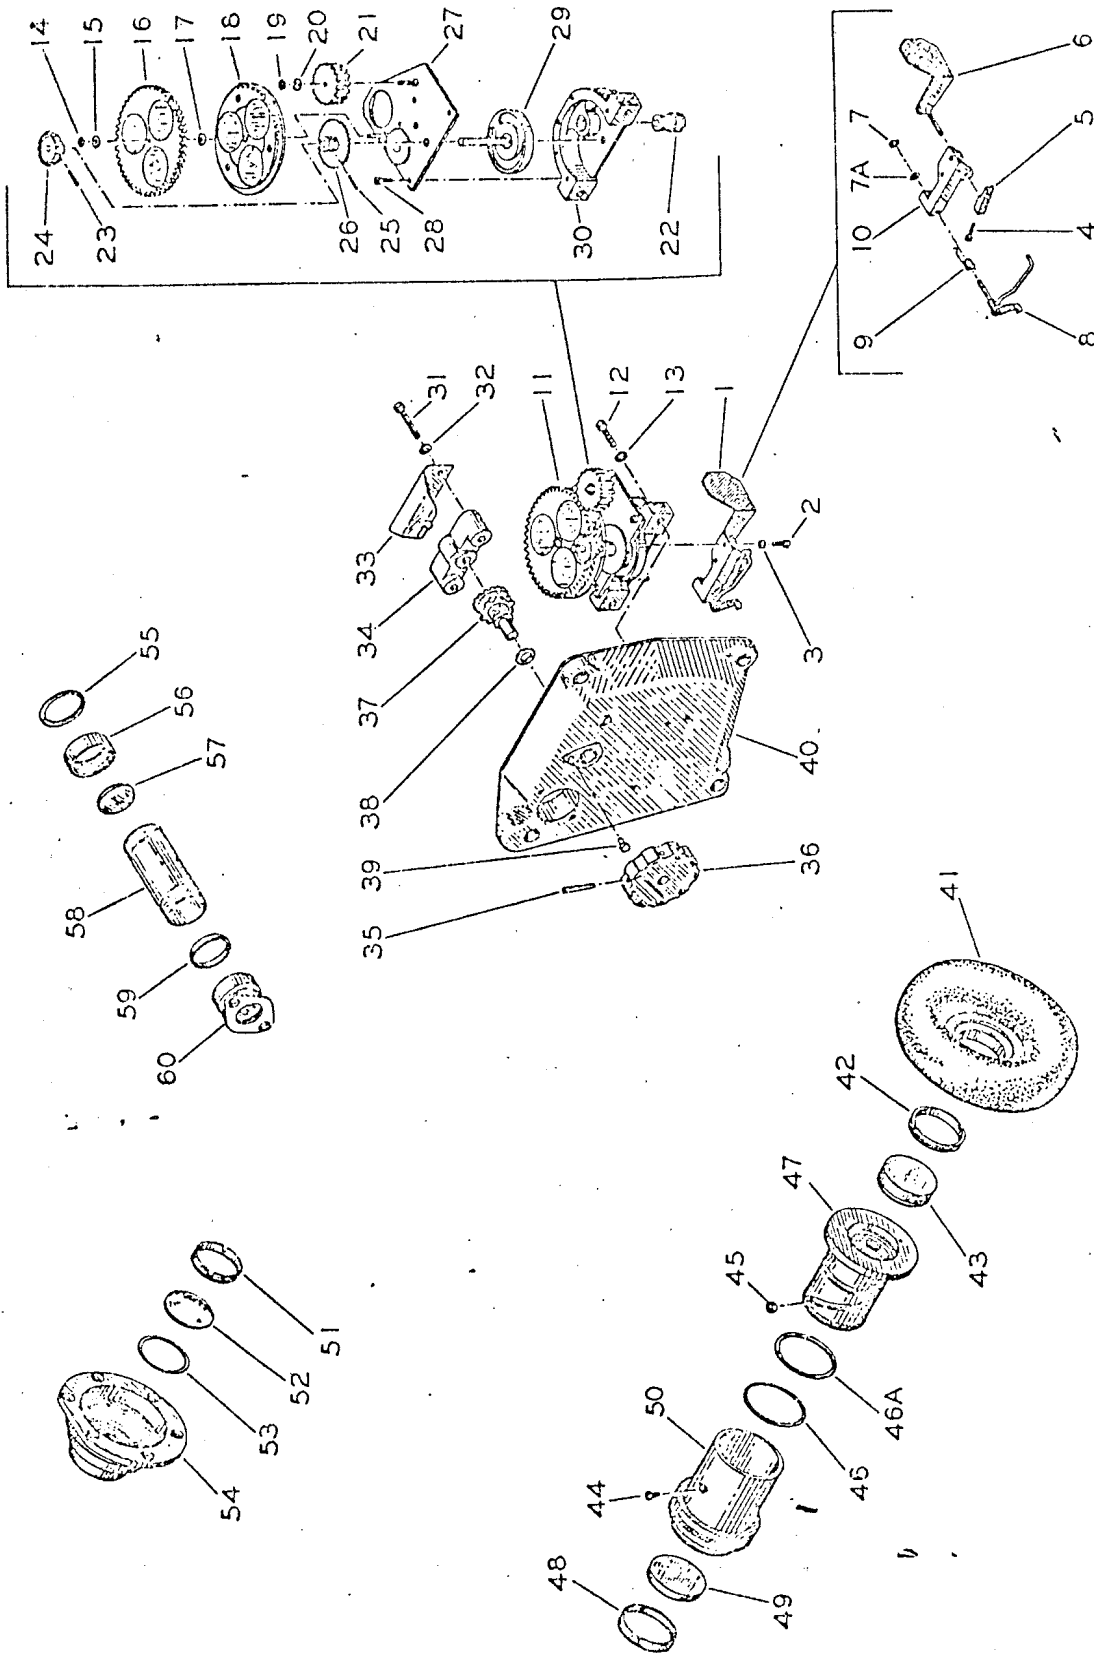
Left Cover, Eyepiece, Field Lens and Desiccator Assemblies
